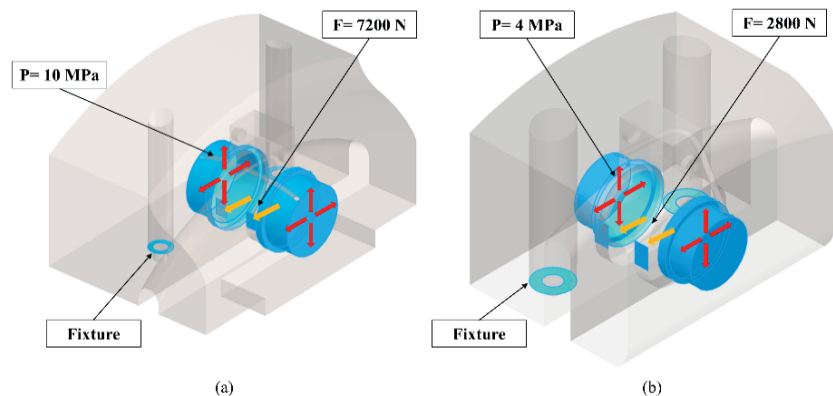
The design space, the loads, and the boundary conditions of the housings: (a) Housing of the front caliper, (b) Housing of the rear caliper.
